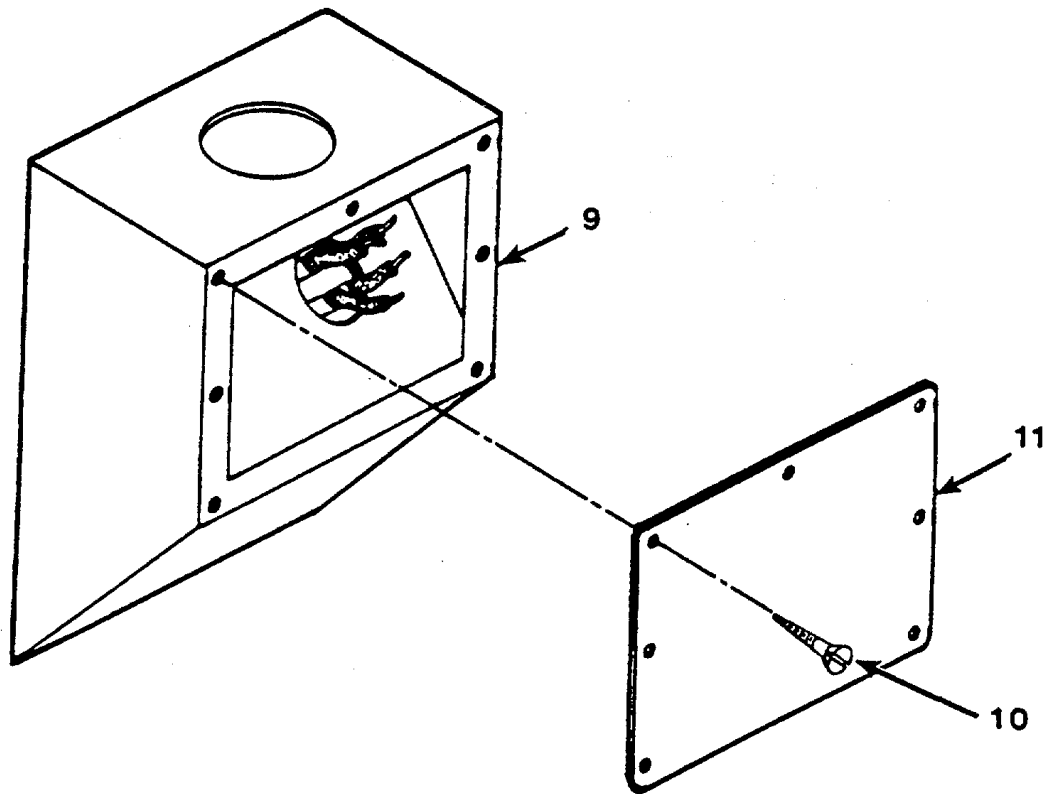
Main Power Receptacle Assembly (Sheet 2 of 2)
